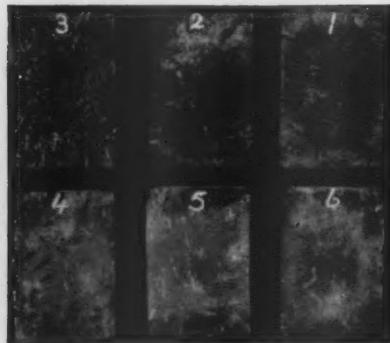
SPECIMEN CASTINGS OF TABLE 9. CLEANED BY WIRE BRUSH ONLY.
